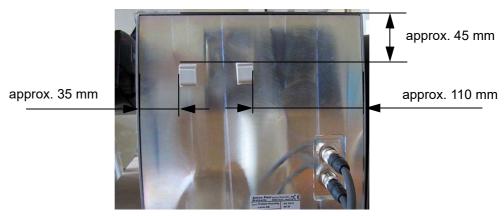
6 Lovis Module Housing ME, mounting the cable clips
